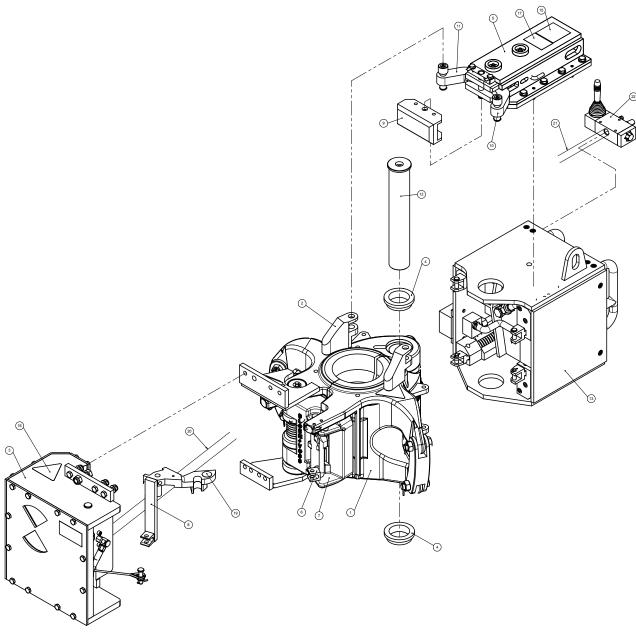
612970-Y-BC ACL 250 Elevator exploded View
